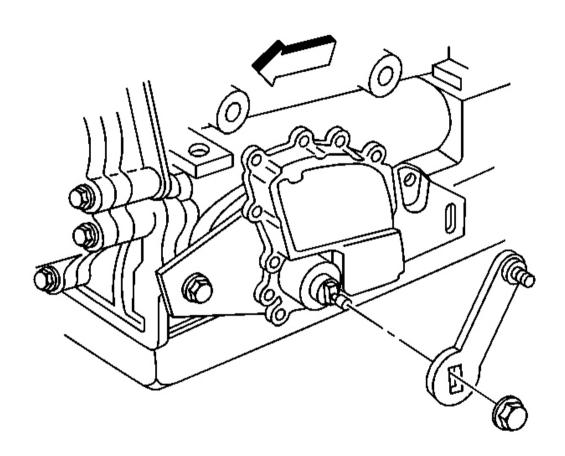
Range Selector (Shift) Lever & Nuts Courtesy of GENERAL MOTORS CORP.
